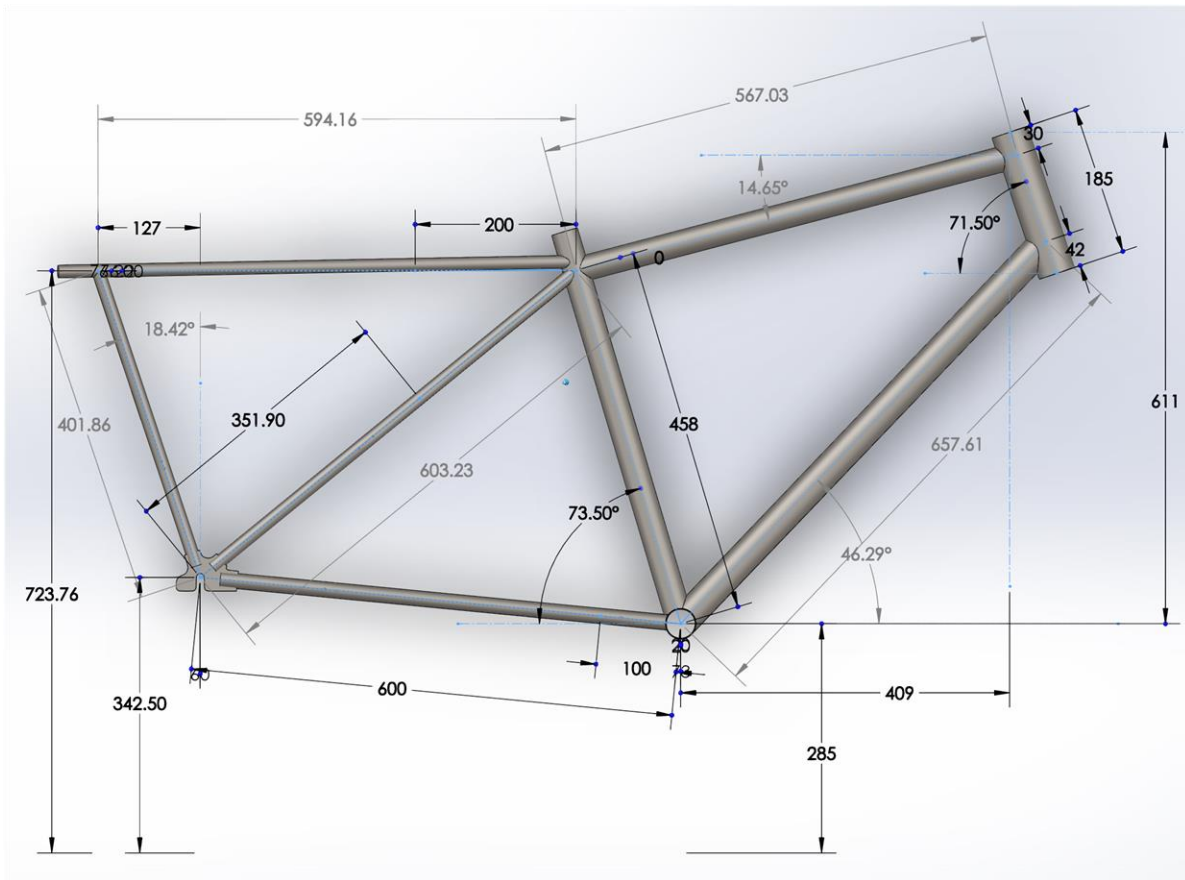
Final frame geometry in Solidworks sketch (all dims. in mm)
